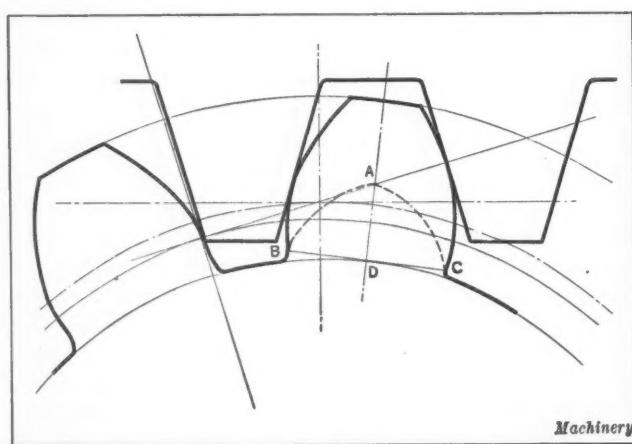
Spiral Bevel Gear of 10-47-tooth Ratio and 14 1/2-degree Pressure Angle
